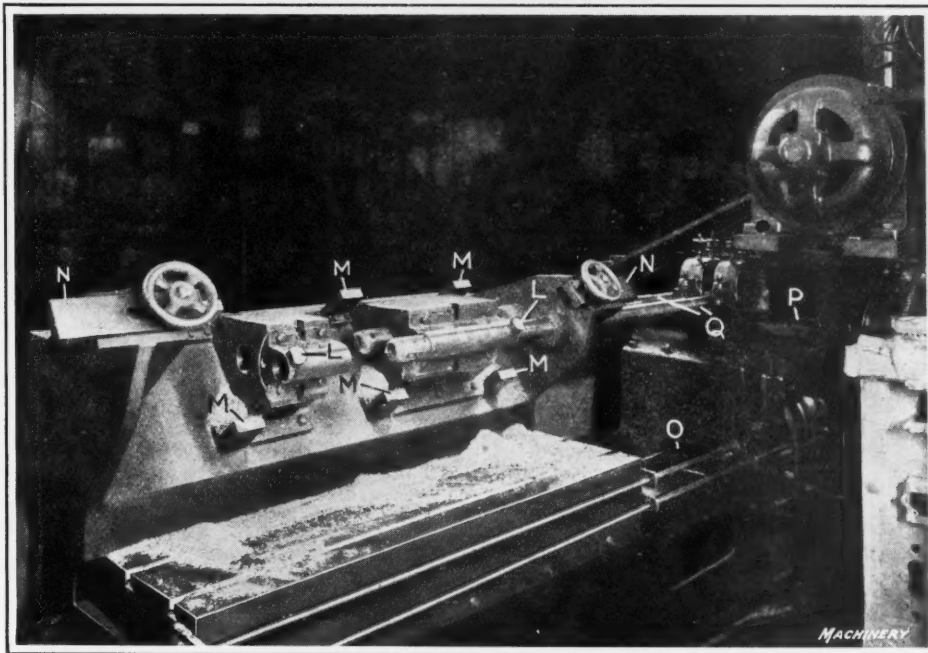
Special-purpose Duplex Boring Machine for simultaneously rough-boring the Crankshaft and Camshaft Bearings of Chandler Crankcases
